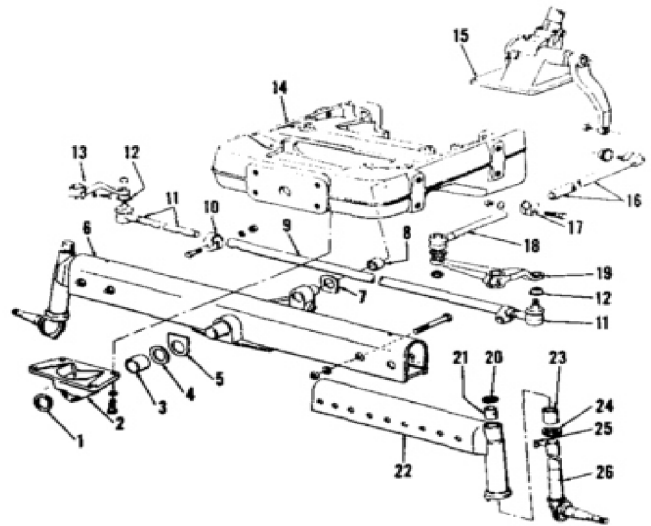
Exploded view of model 4100 front axle assembly, front support and steering linkage. Manual steering linkage is shown; refer to Fig. 35 for power steering system. Refer to Fig. 21 for exploded view of the steering gear assembly (15) that is used on both manual steering and power steering models.
